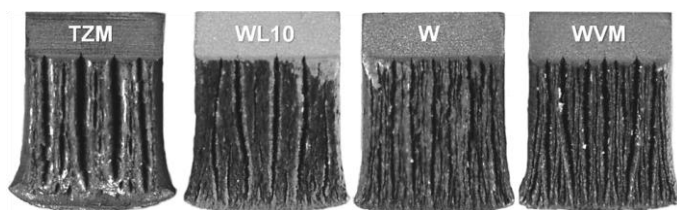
Fracture surface of Charpy specimens of molybdenum and tungsten-based plate materials.
